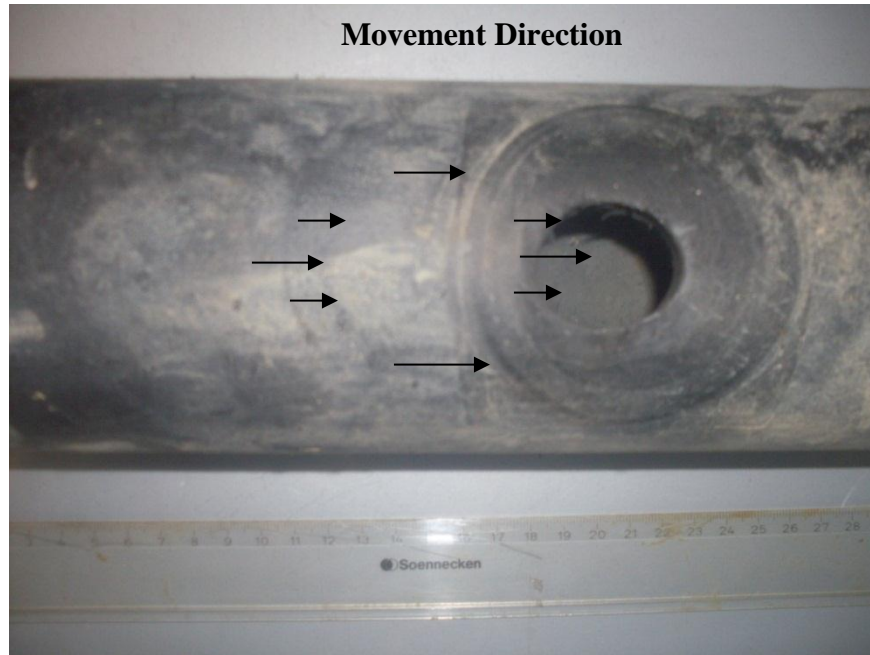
Failure case (H-1) for PE pipe connection failure
